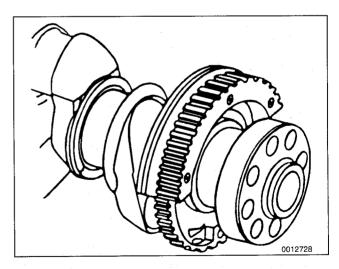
Crankshaft position/rpm sensor toothed wheel mounted to rear of crankshaft OBD II compliant cars. The sensor is mounted in the left rear side of the cylinder block.
